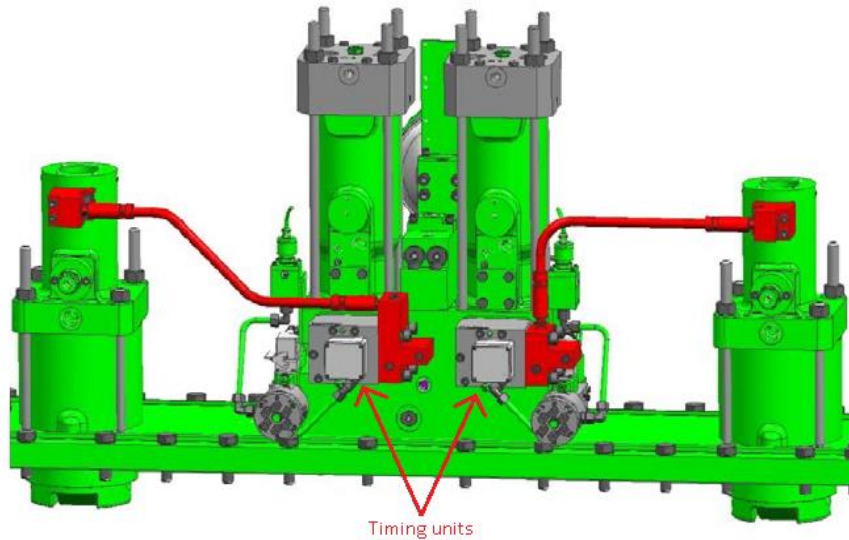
Exhaust Valve Actuator Timing Unit mounted on the HCU [22]
